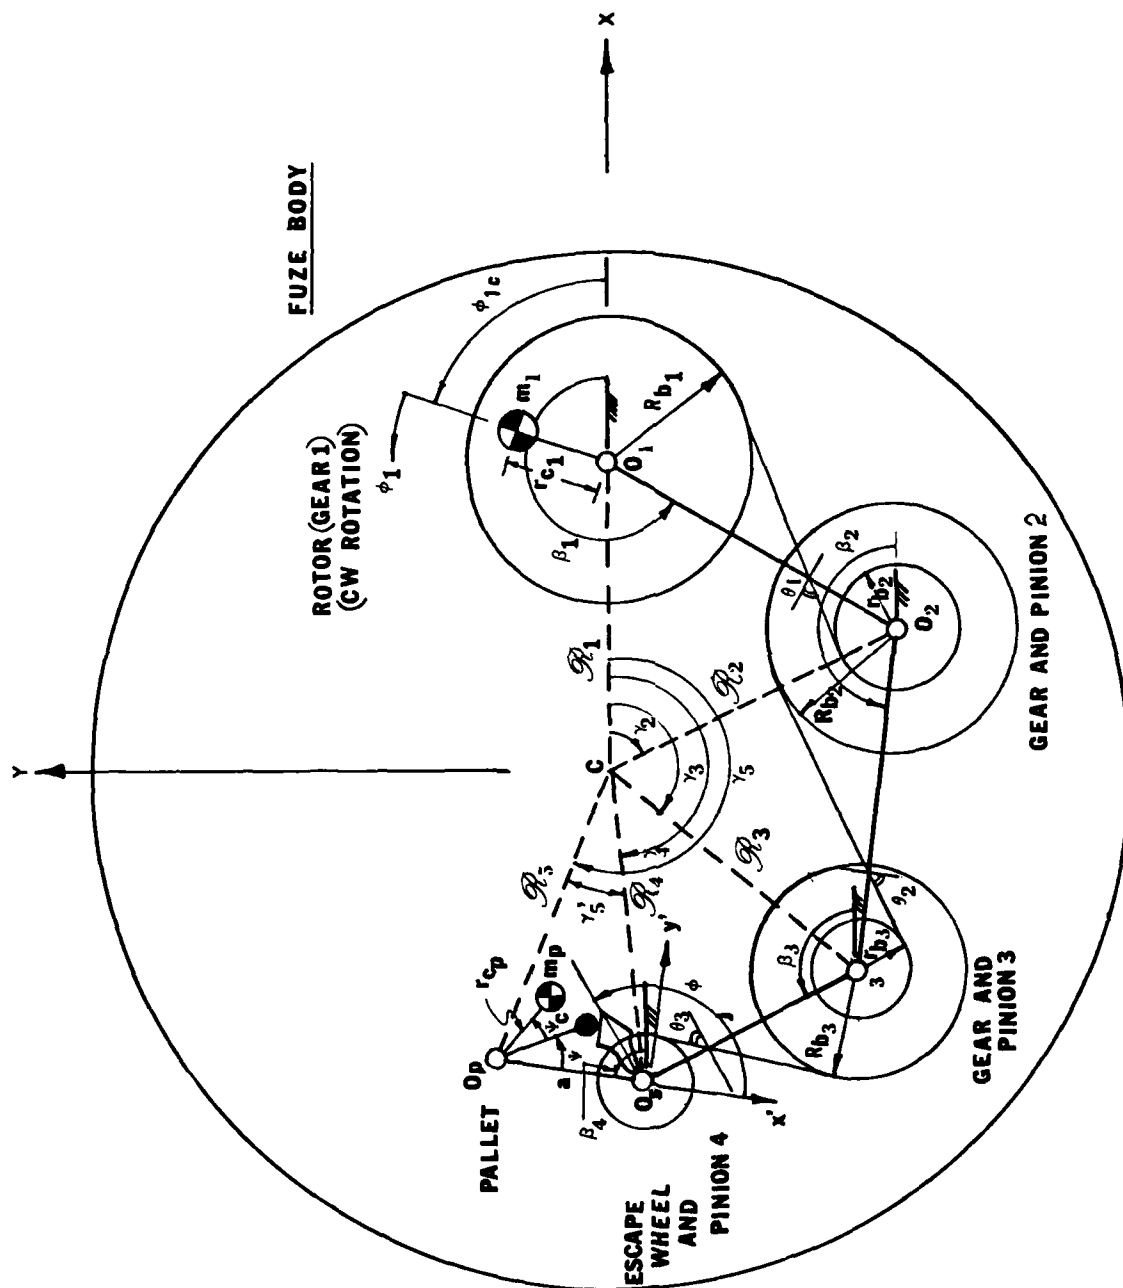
Rotor driven S&A device with three pass step-up gear train, configuration no. 2
